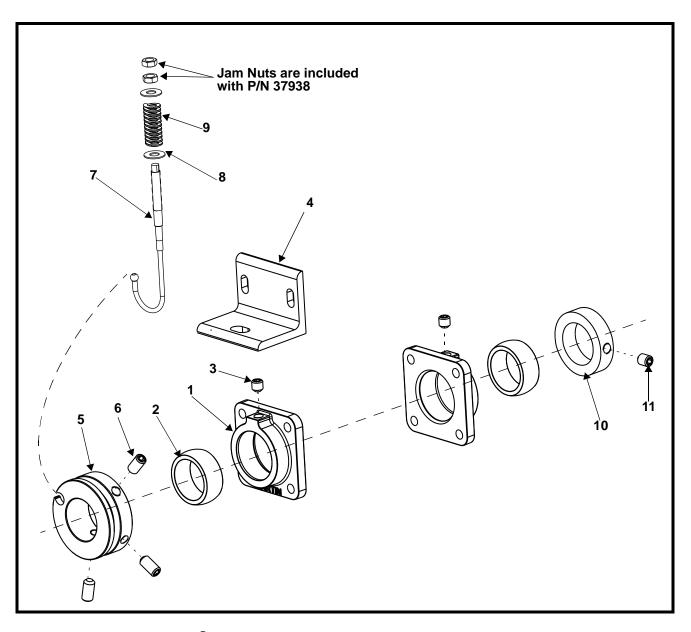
Martin[®] Spring Cable Tensioner Assembly, P/N 37944 (page 2 of 3)
